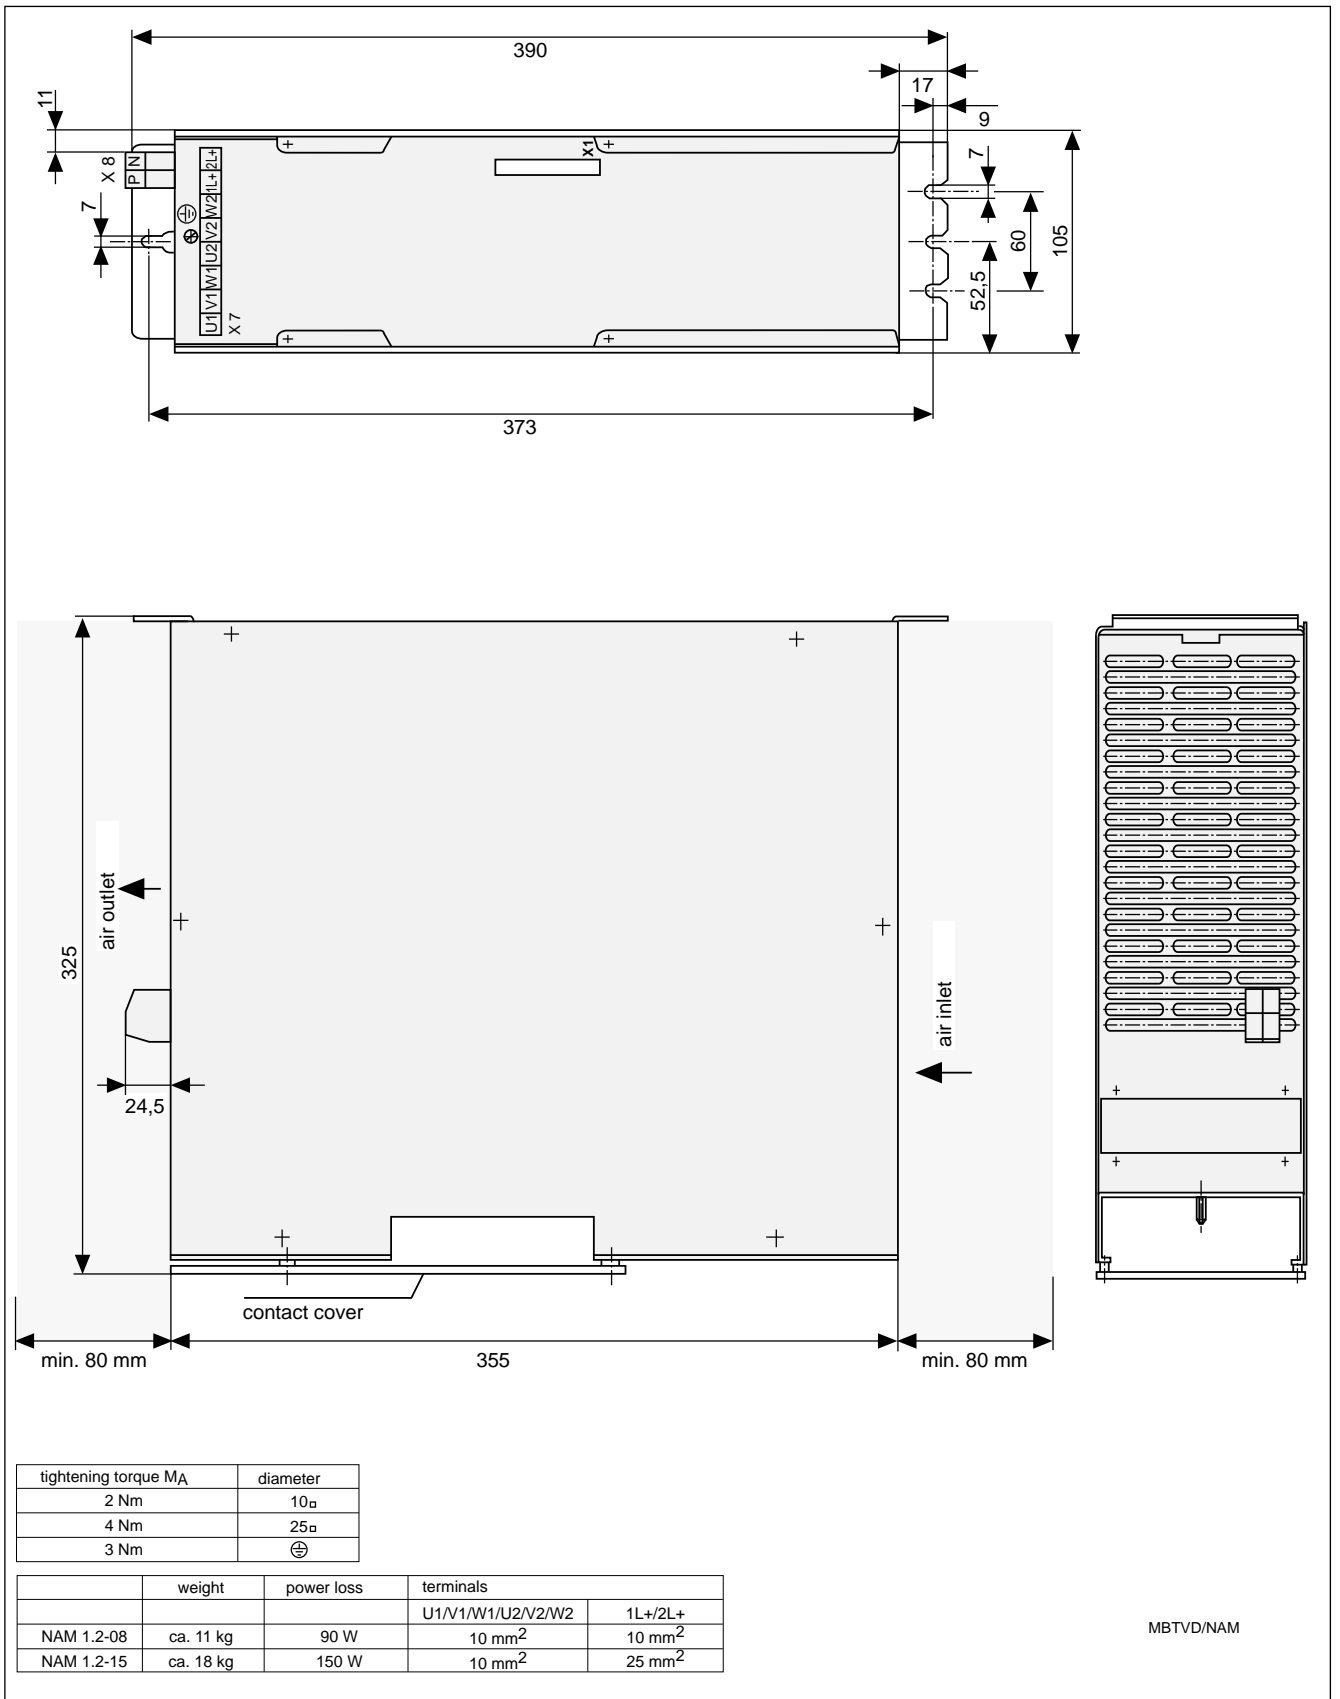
NAM 1.2 power supply module - dimension sheet
